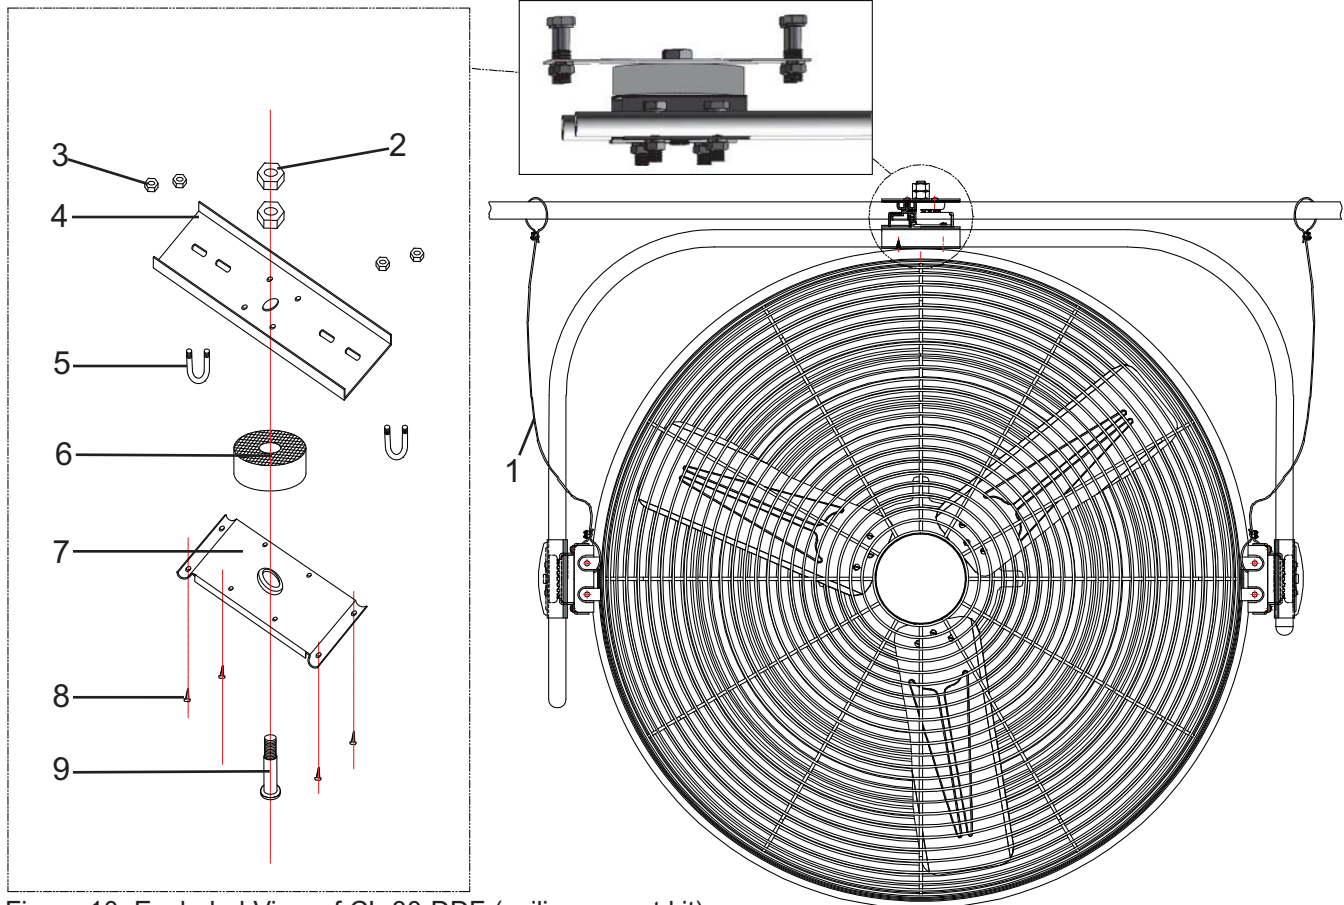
Exploded View of CL-30-DDF (ceiling mount kit)
